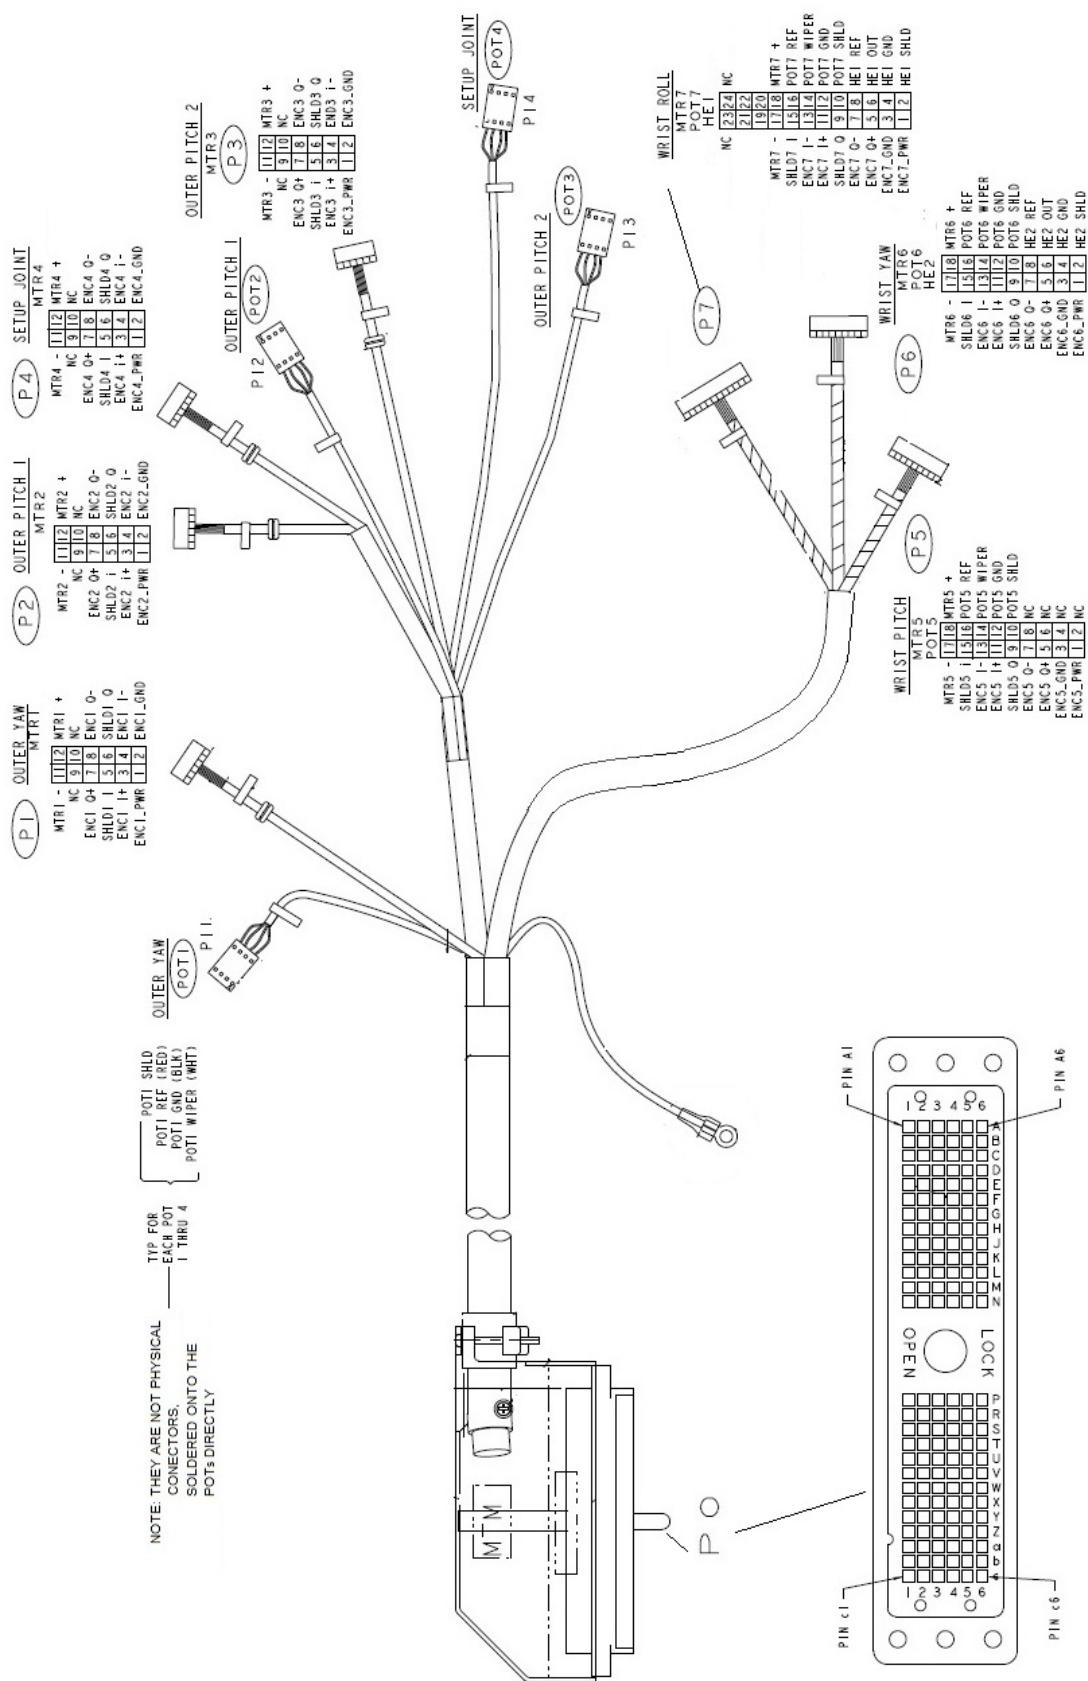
MTM INTERFACE CONNECTOR WIRING LAYOUT.
